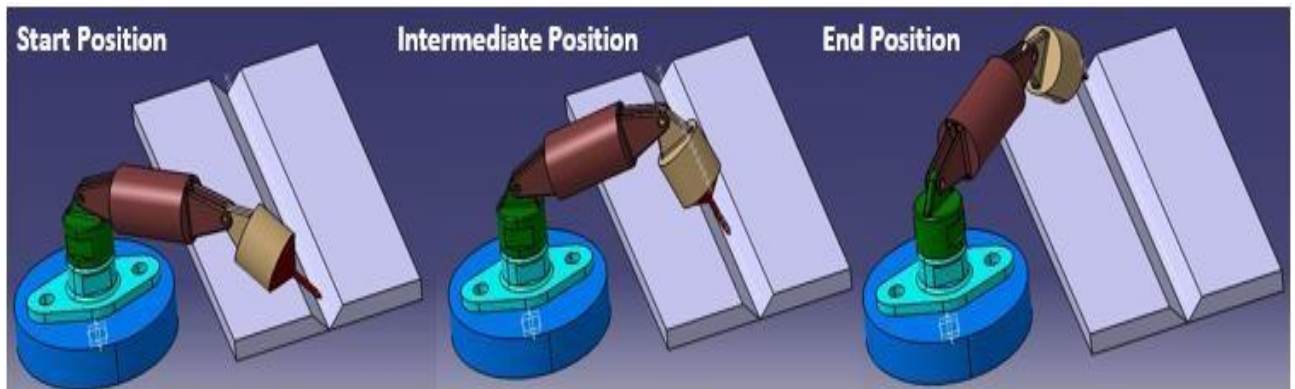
Robot following seam path for performing Welding operation of butt joint
